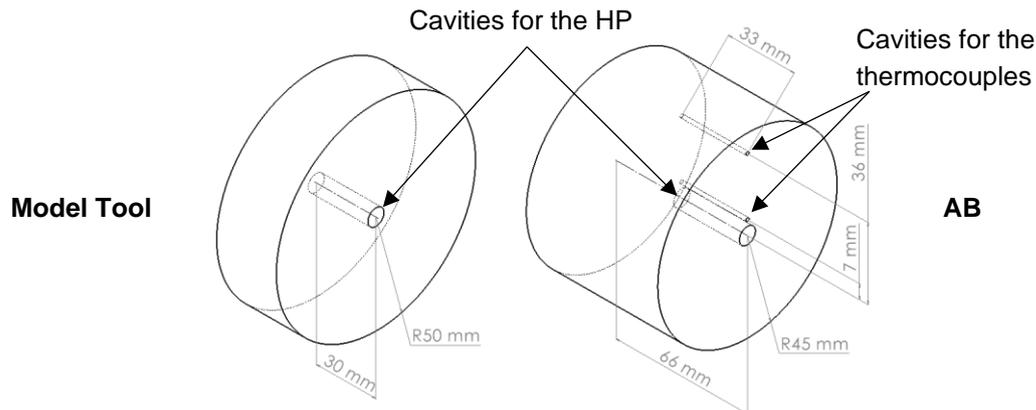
Basic dimensions of the model tools (left) and the AB (right)
